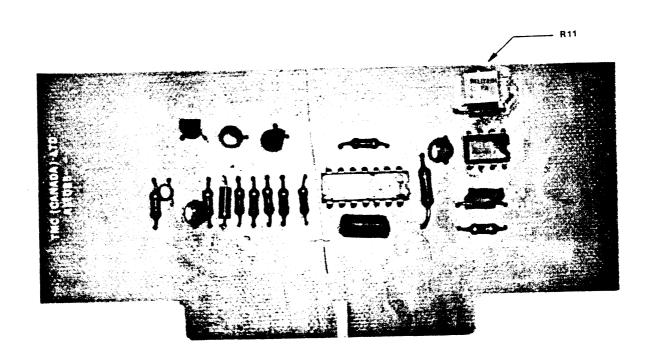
FREQUENCY TO VOLTAGE CONVERTER ASSEMBLY A11085-5
